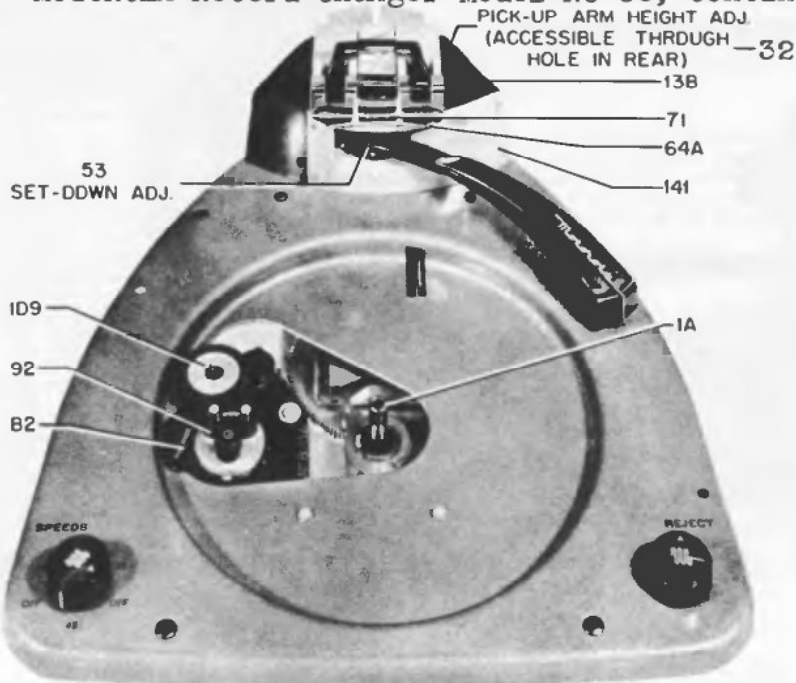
TOP VIEW OF RECORD CHANGER WITH TURNTABLE REMOVED
